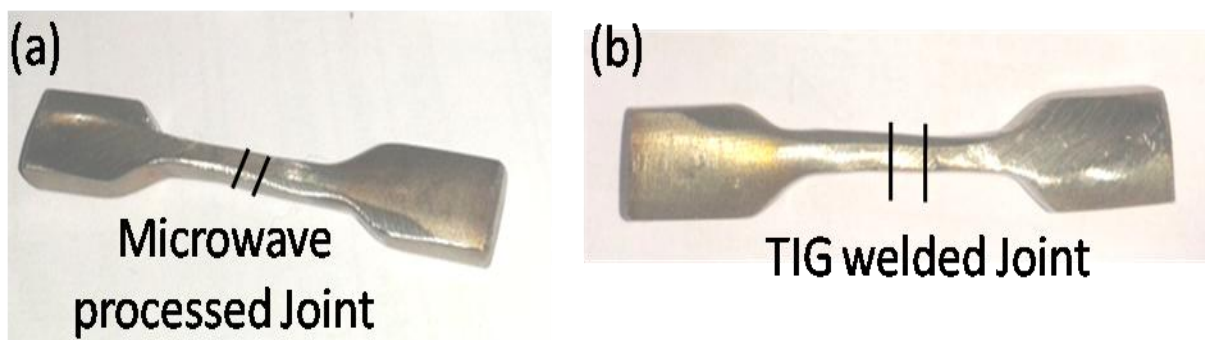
Joints of SS-316 steel by (a) Microwave joining and (b) TIG welding
